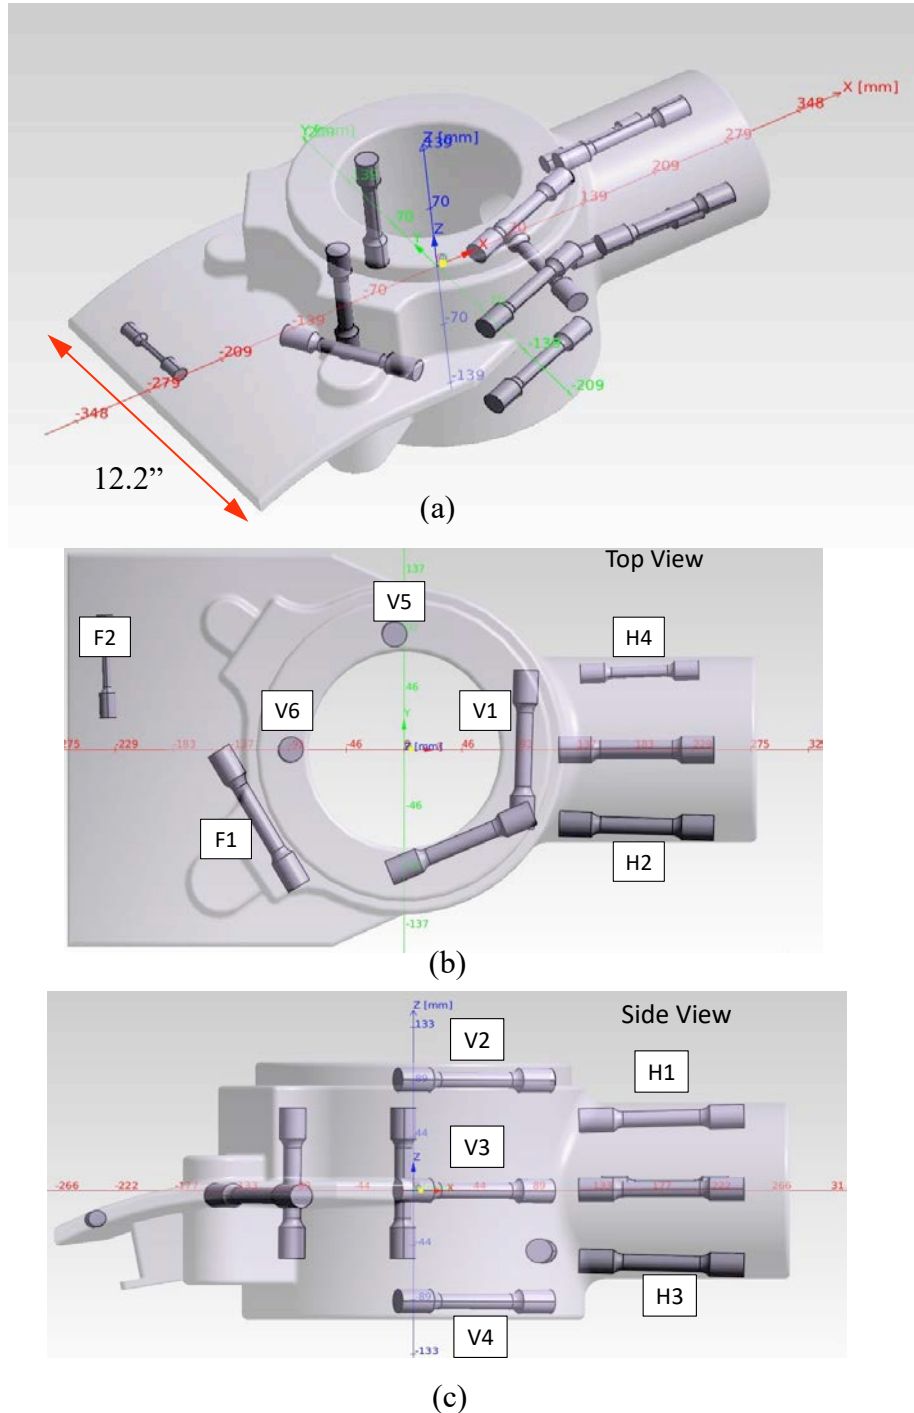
Views (a), (b), and (c) in an x-ray format of the locations of the twelve specimens sectioned out of the platypus castings after heat treatment for tensile testing.
